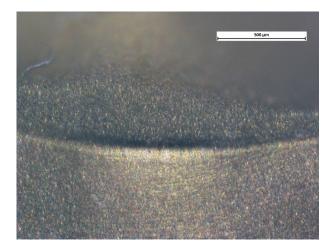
Surface morphology of cutting tool edge geometry before the start of milling (50x).
